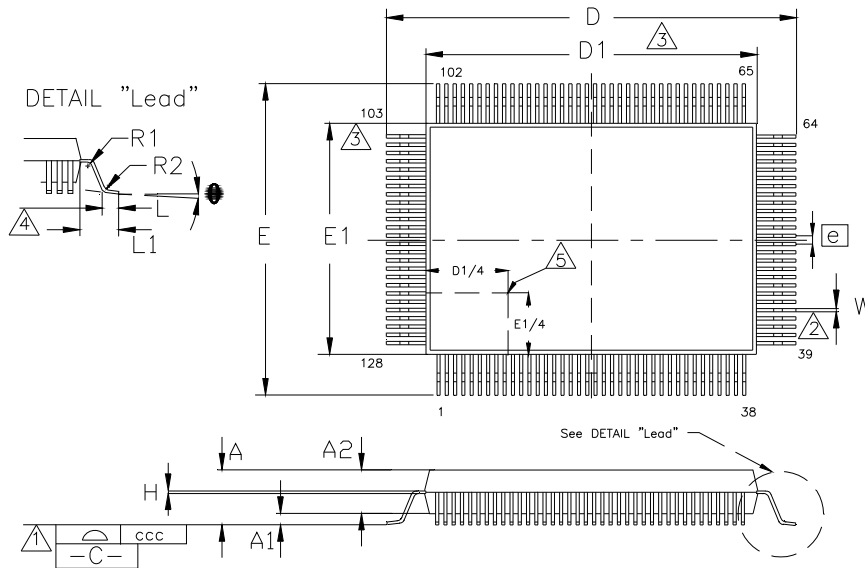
128 PIN QFP Package Outline, 14x20x2.7 Body, 3.2 mm Footprint
